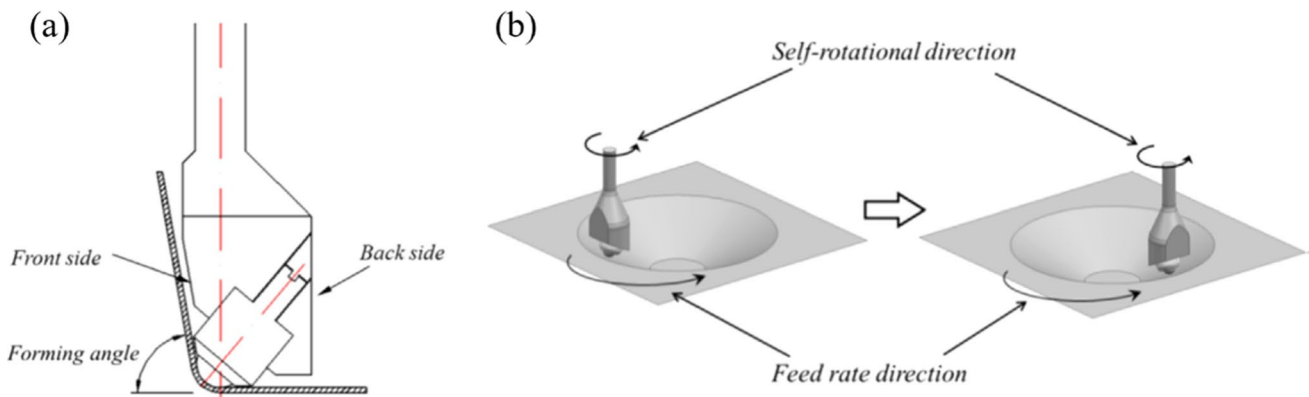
Ball-roller tool and working mechanism. a Section view of ball-roller tool, b working mechanism in tool path [65]
